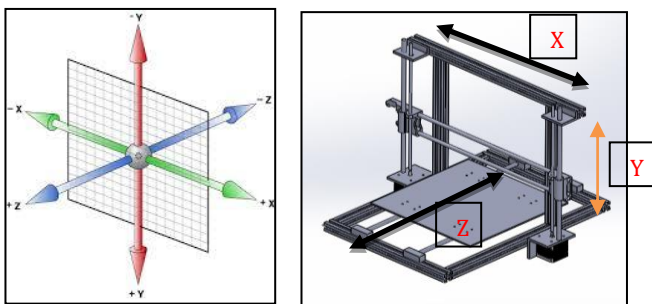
CAD Model of 3D Printer with X, Y and Z Movement
